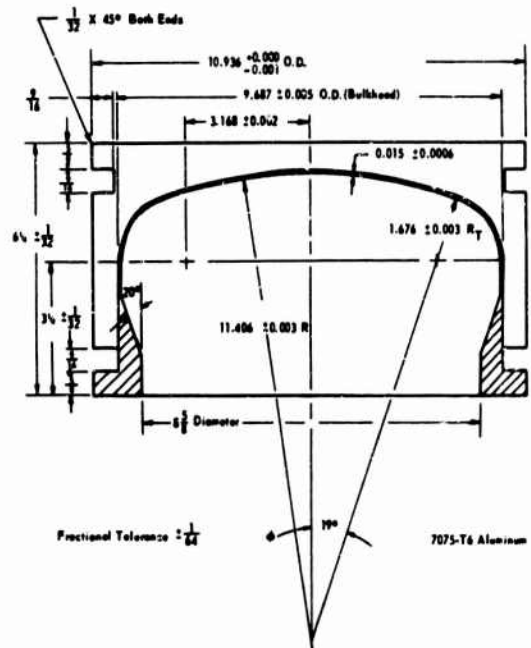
MACHINING DRAWING FOR MACHINED TORISPHERICAL SHELL
